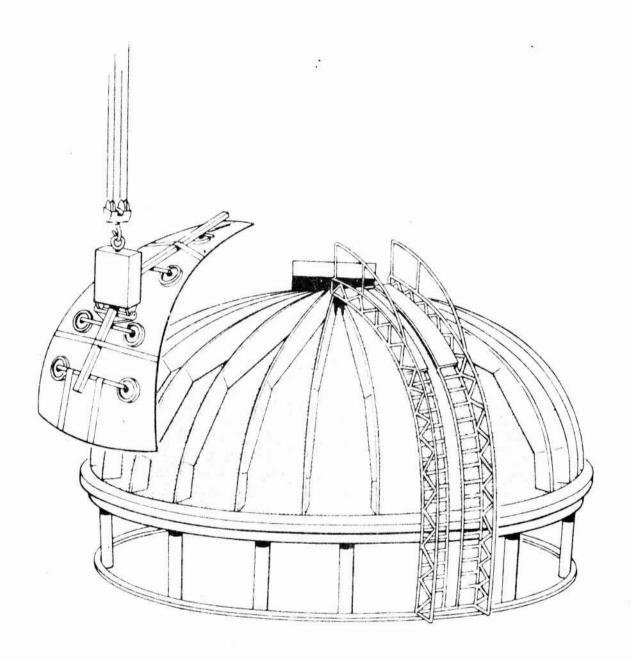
Loading Gore Segments Into Welding Fixture
